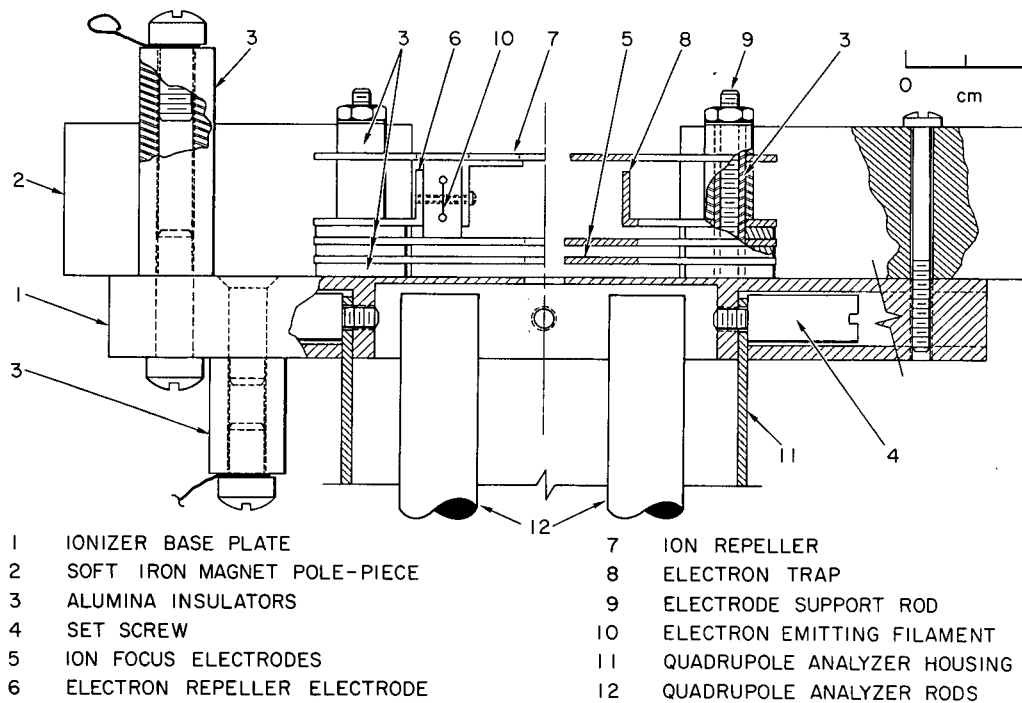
VIEW OF PARTLY DISASSEMBLED IONIZER
